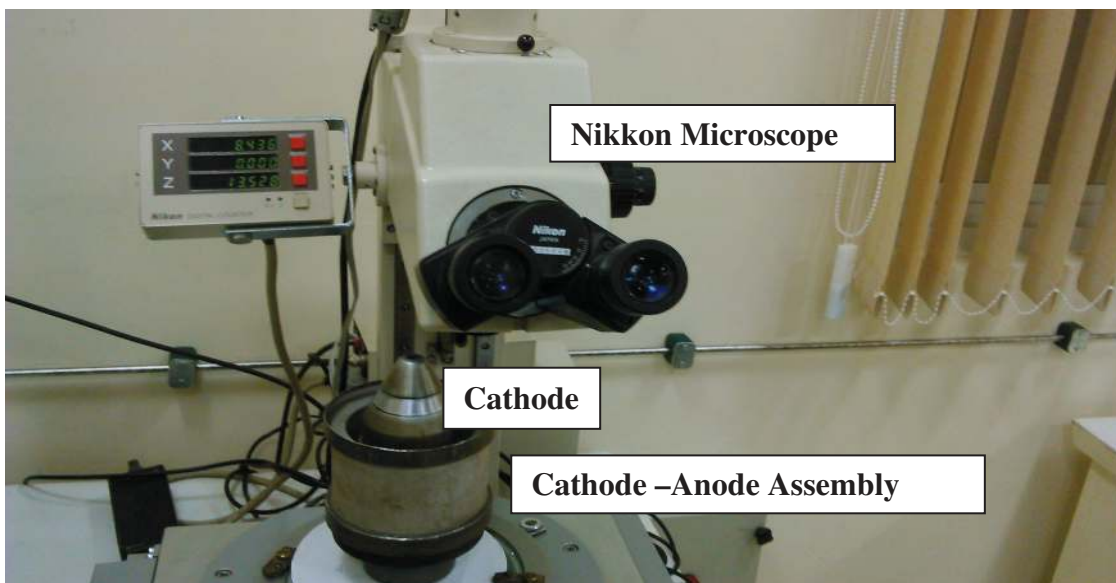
Alignment measurement of cathode in cathode-anode assembly.
